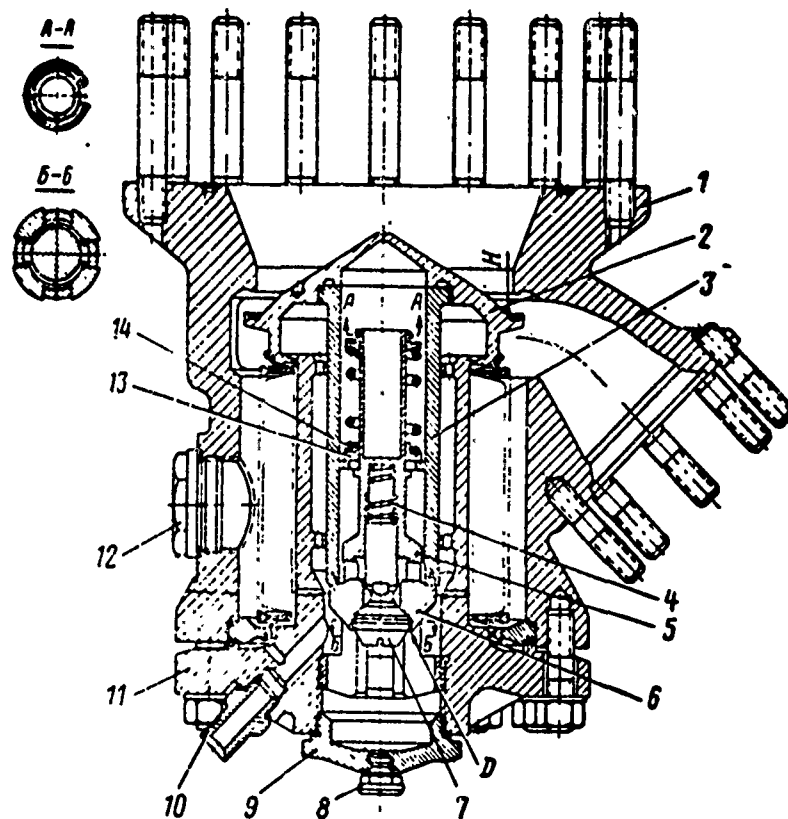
Main oxidizer valve: 1 - housing; 2 - valve disk; 3 - sleeve; 4 - spring; 5 - support; 6 - cross-arm; 7 - explosive bolt; 8, 12 - plugs; 9, 11 - covers; 10 - connector tube; 13 - support; 14 - spring.
